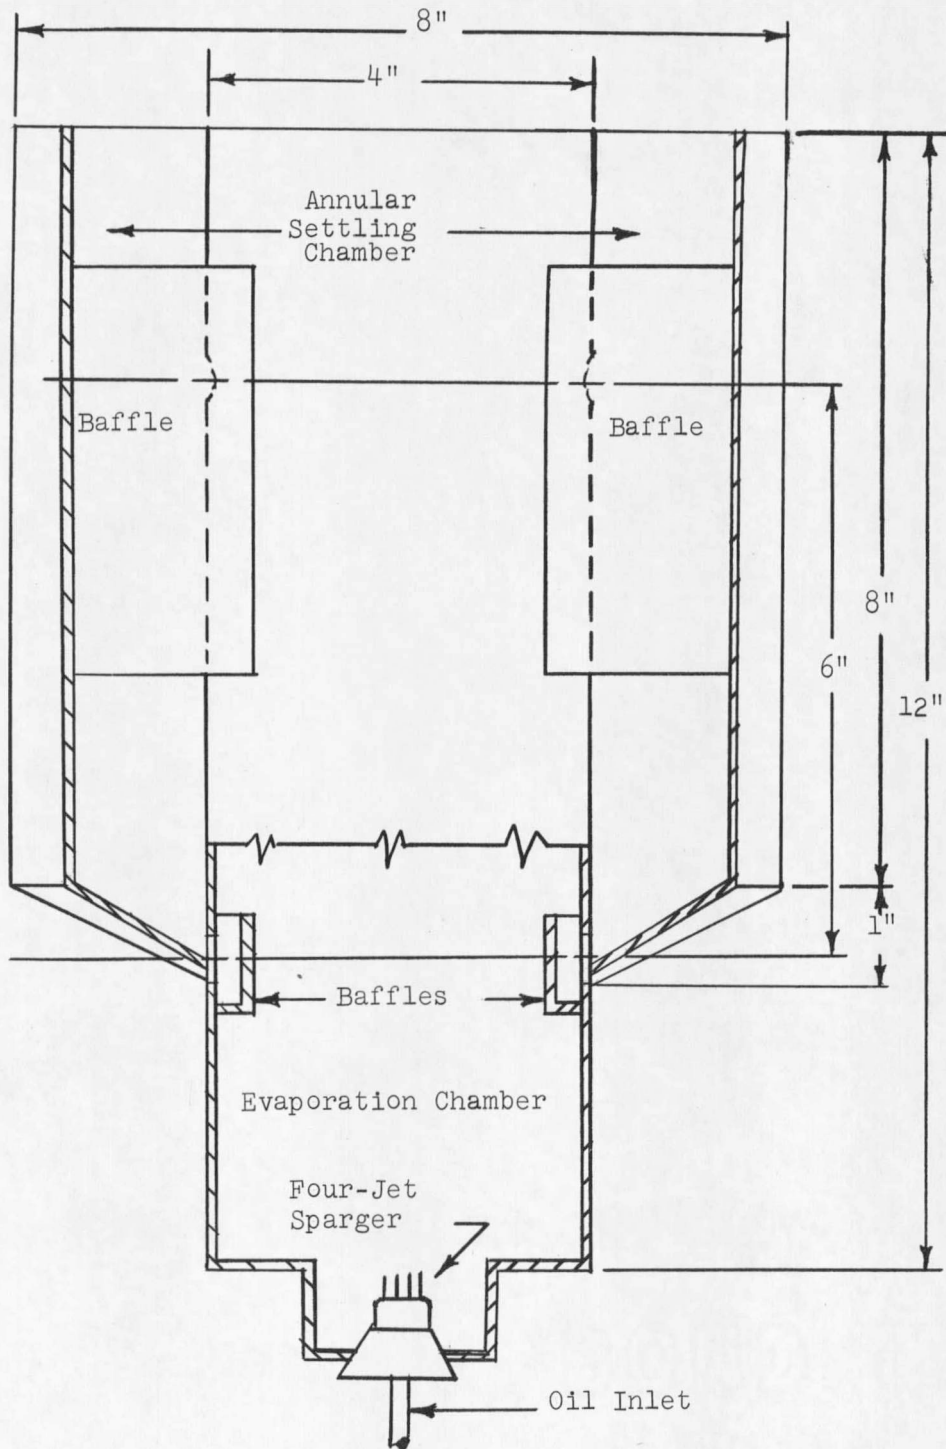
Cutaway Diagram of the Concentric-Pipe Evaporator.
